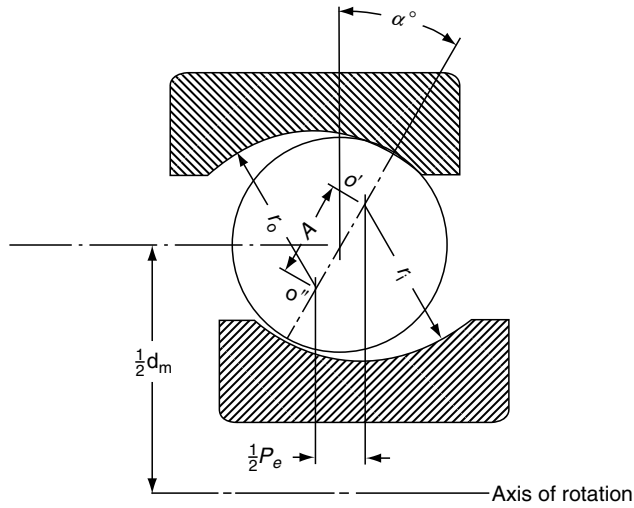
Radial ball bearing showing ball-raceway contact due to axial shift of inner and outer rings.
